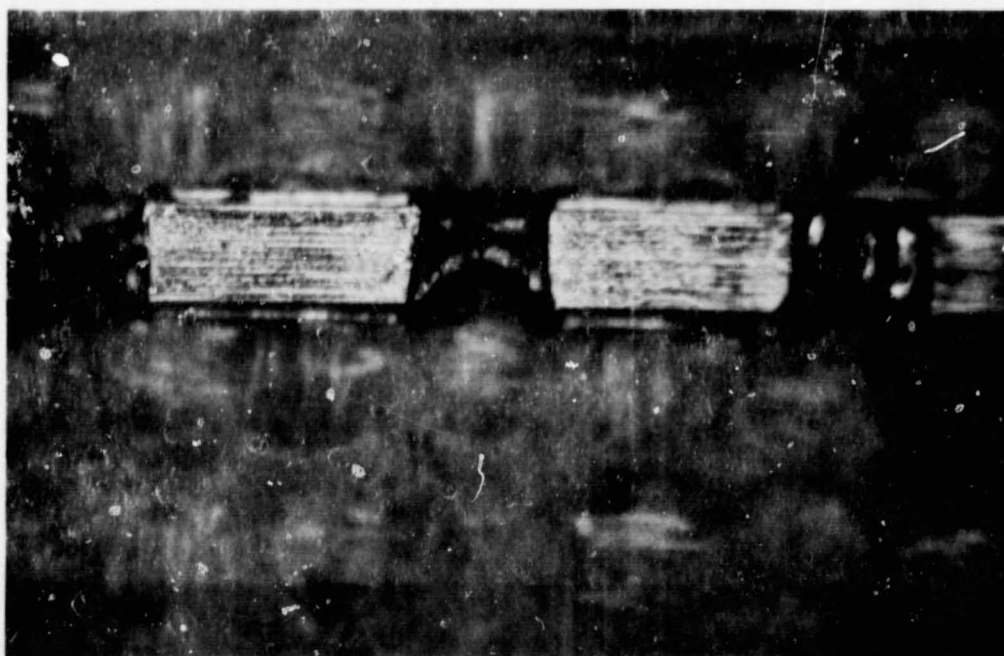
Cracked Weld (Also Showing Metal Expulsion and Deformation)
